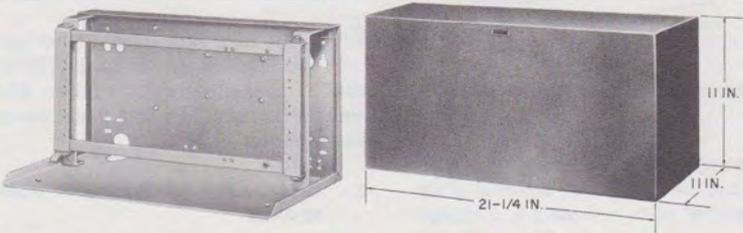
4-Plate Cabinet per ED-91472-70 (MD)
